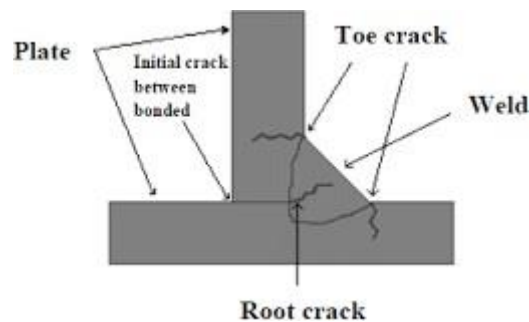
Typical weld geometry shown in cross-section (https://www.researchgate.net/figure/Cracks-initiation-at-weld-toes_fig2_353287193)
